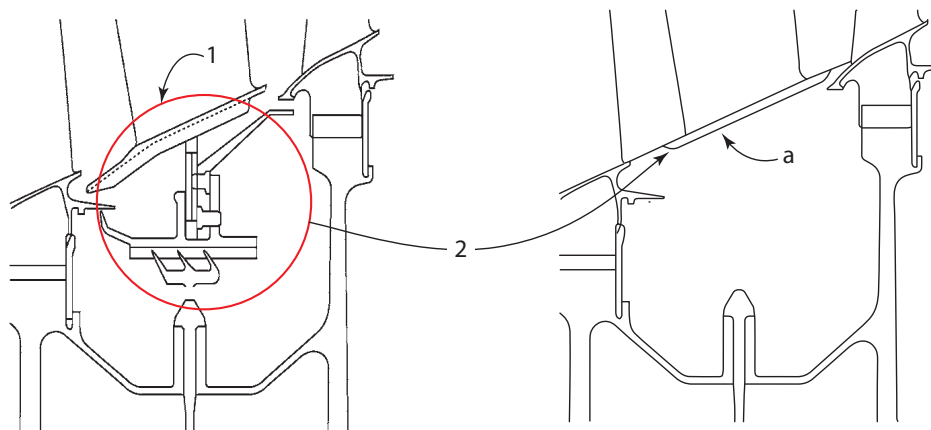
Introducing the simplification process of the interstage sealing arrangement with a side view of the seal. Labels: (1) Current arrangement with secondary assembly and abrasible lining; (2) Simplified arrangement showing no secondary assembly and a continuous rotor; (a) Abrasive liner applied directly on the rotor and immediately beneath stator blades. Figure extracted from Piggott *et al.* [15] and adapted to show the abrasive lining.
